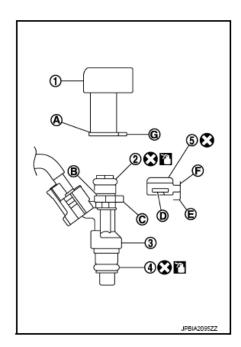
Locating Fuel Injector And Fuel Tube Components Courtesy of NISSAN NORTH AMERICA, INC.
